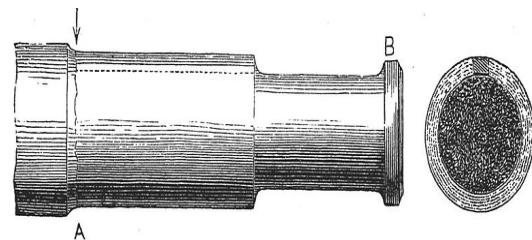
Drawing of a fatigue failure in an axle (1843).
